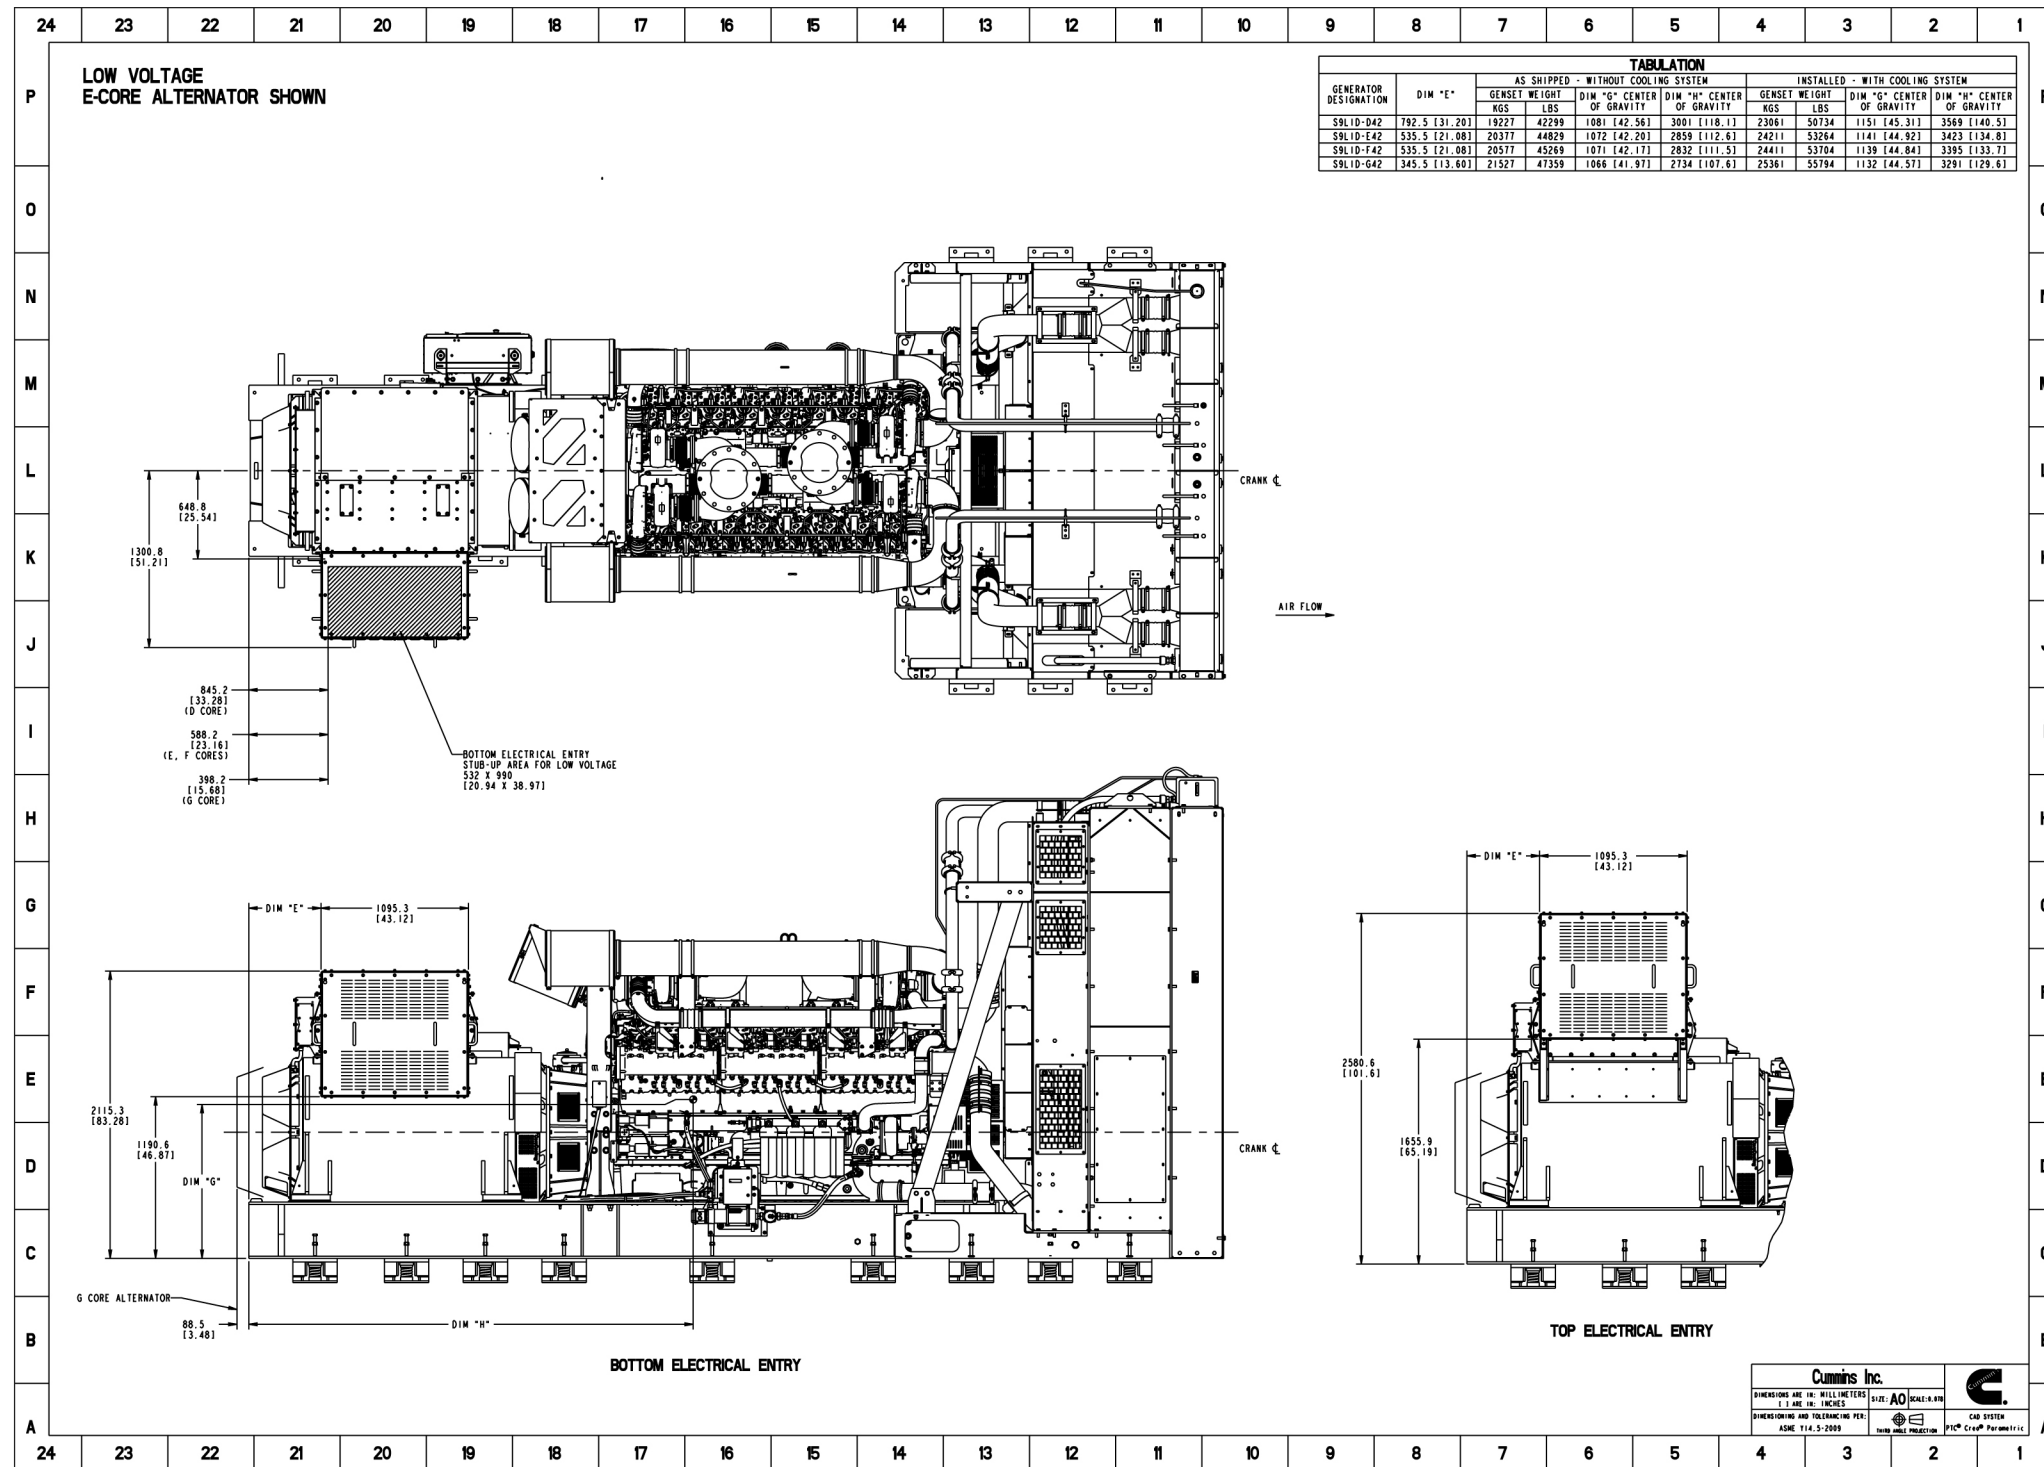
OUTLINE DRAWING (SHEET 3 OF 8)
